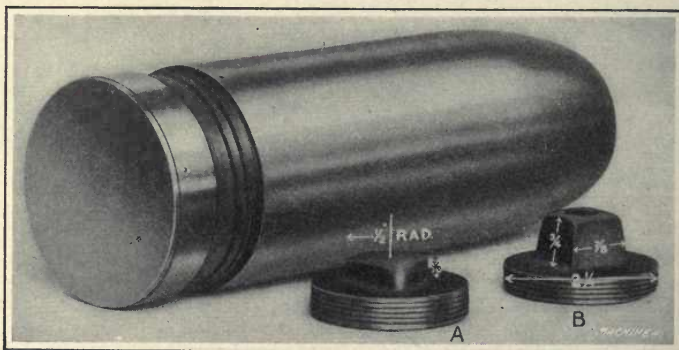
Three-Inch High-explosive Shell, showing Finish left by Besly Grinder; also Two Types of Gas Plugs
